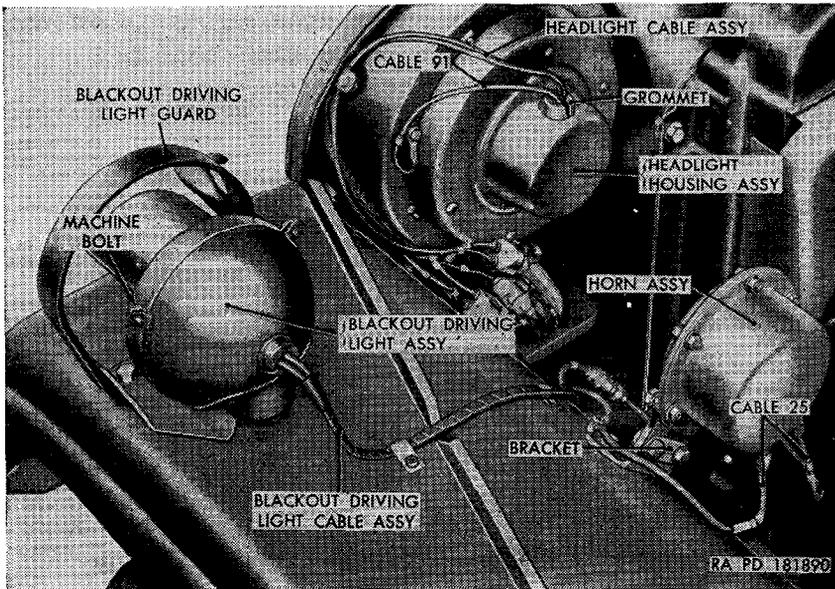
Headlight, blackout driving light, and horn assemblies—installed.
